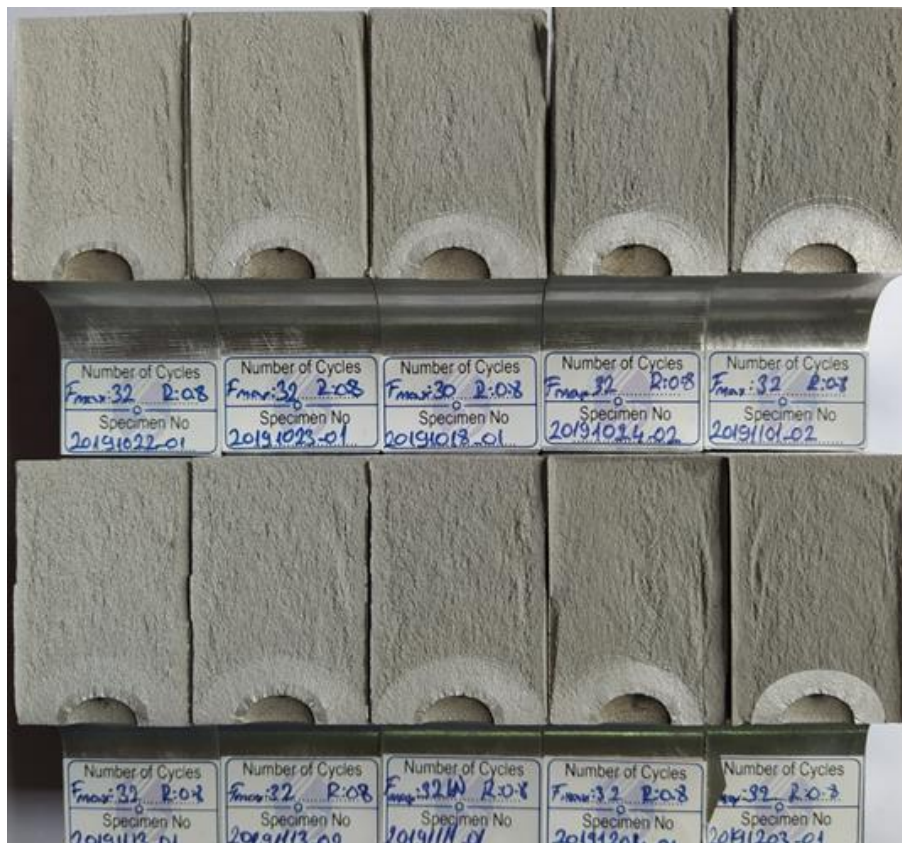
Fracture surfaces from 3-D fatigue crack growth tests under $R=0.8$ constant amplitude
